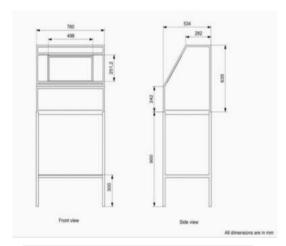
Cad Drawing of Abrasive Blasting Equipment
